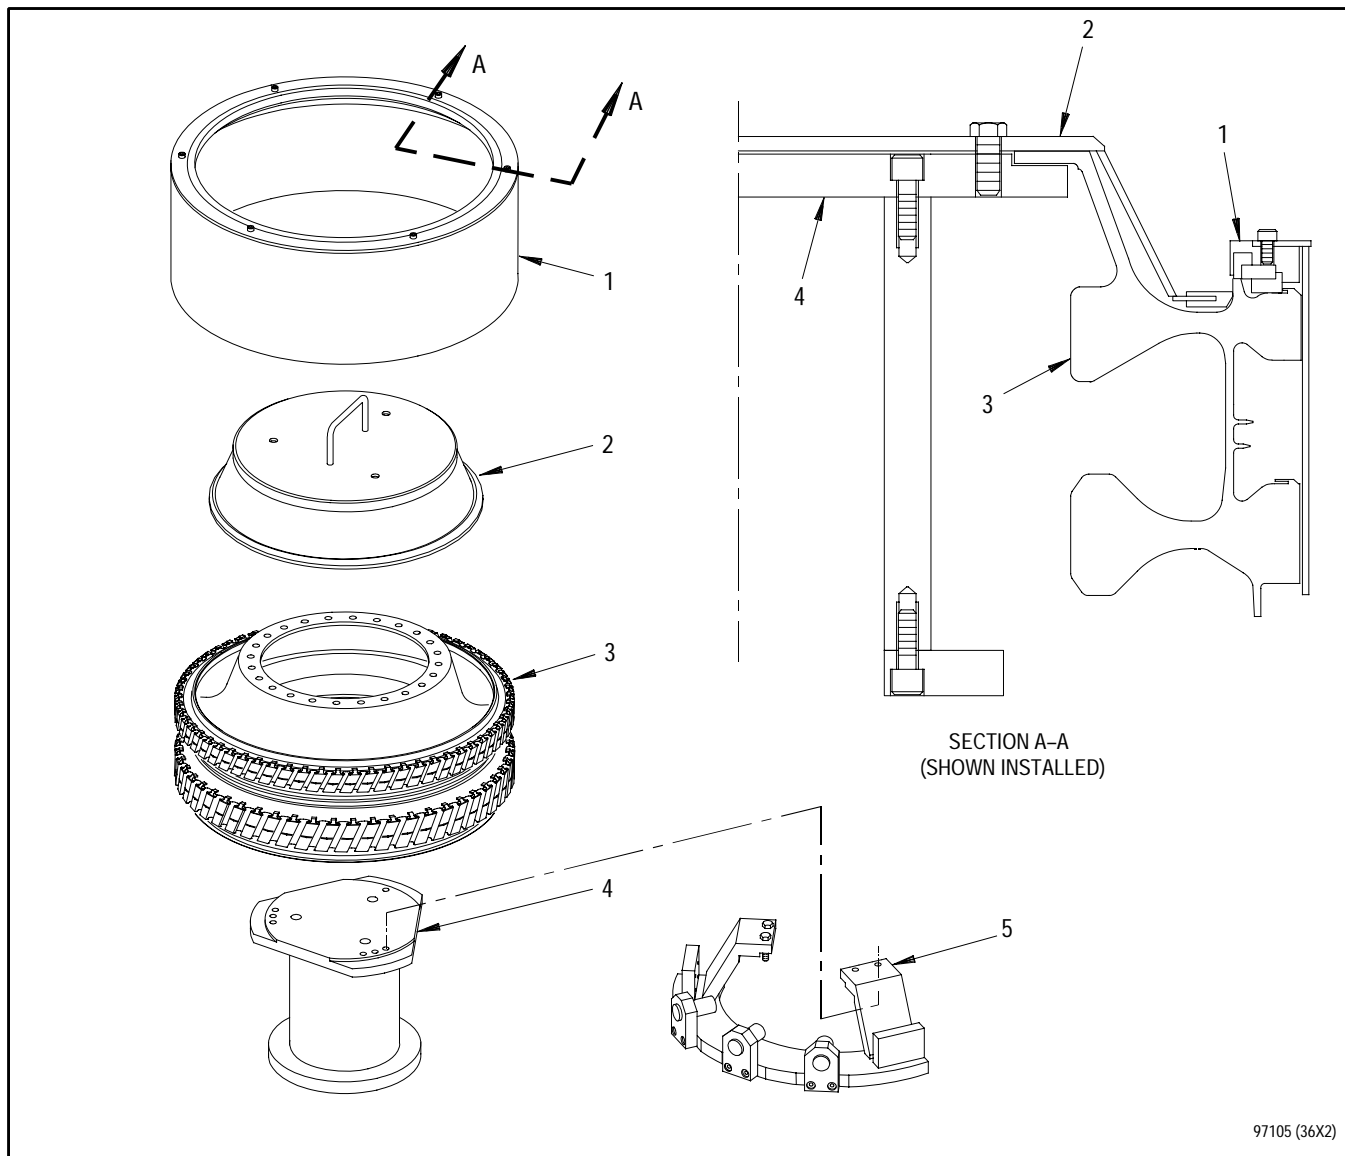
Rear Compressor Front Disk-Drum Rotor Assembly - Shotpeen Tooling Installation
